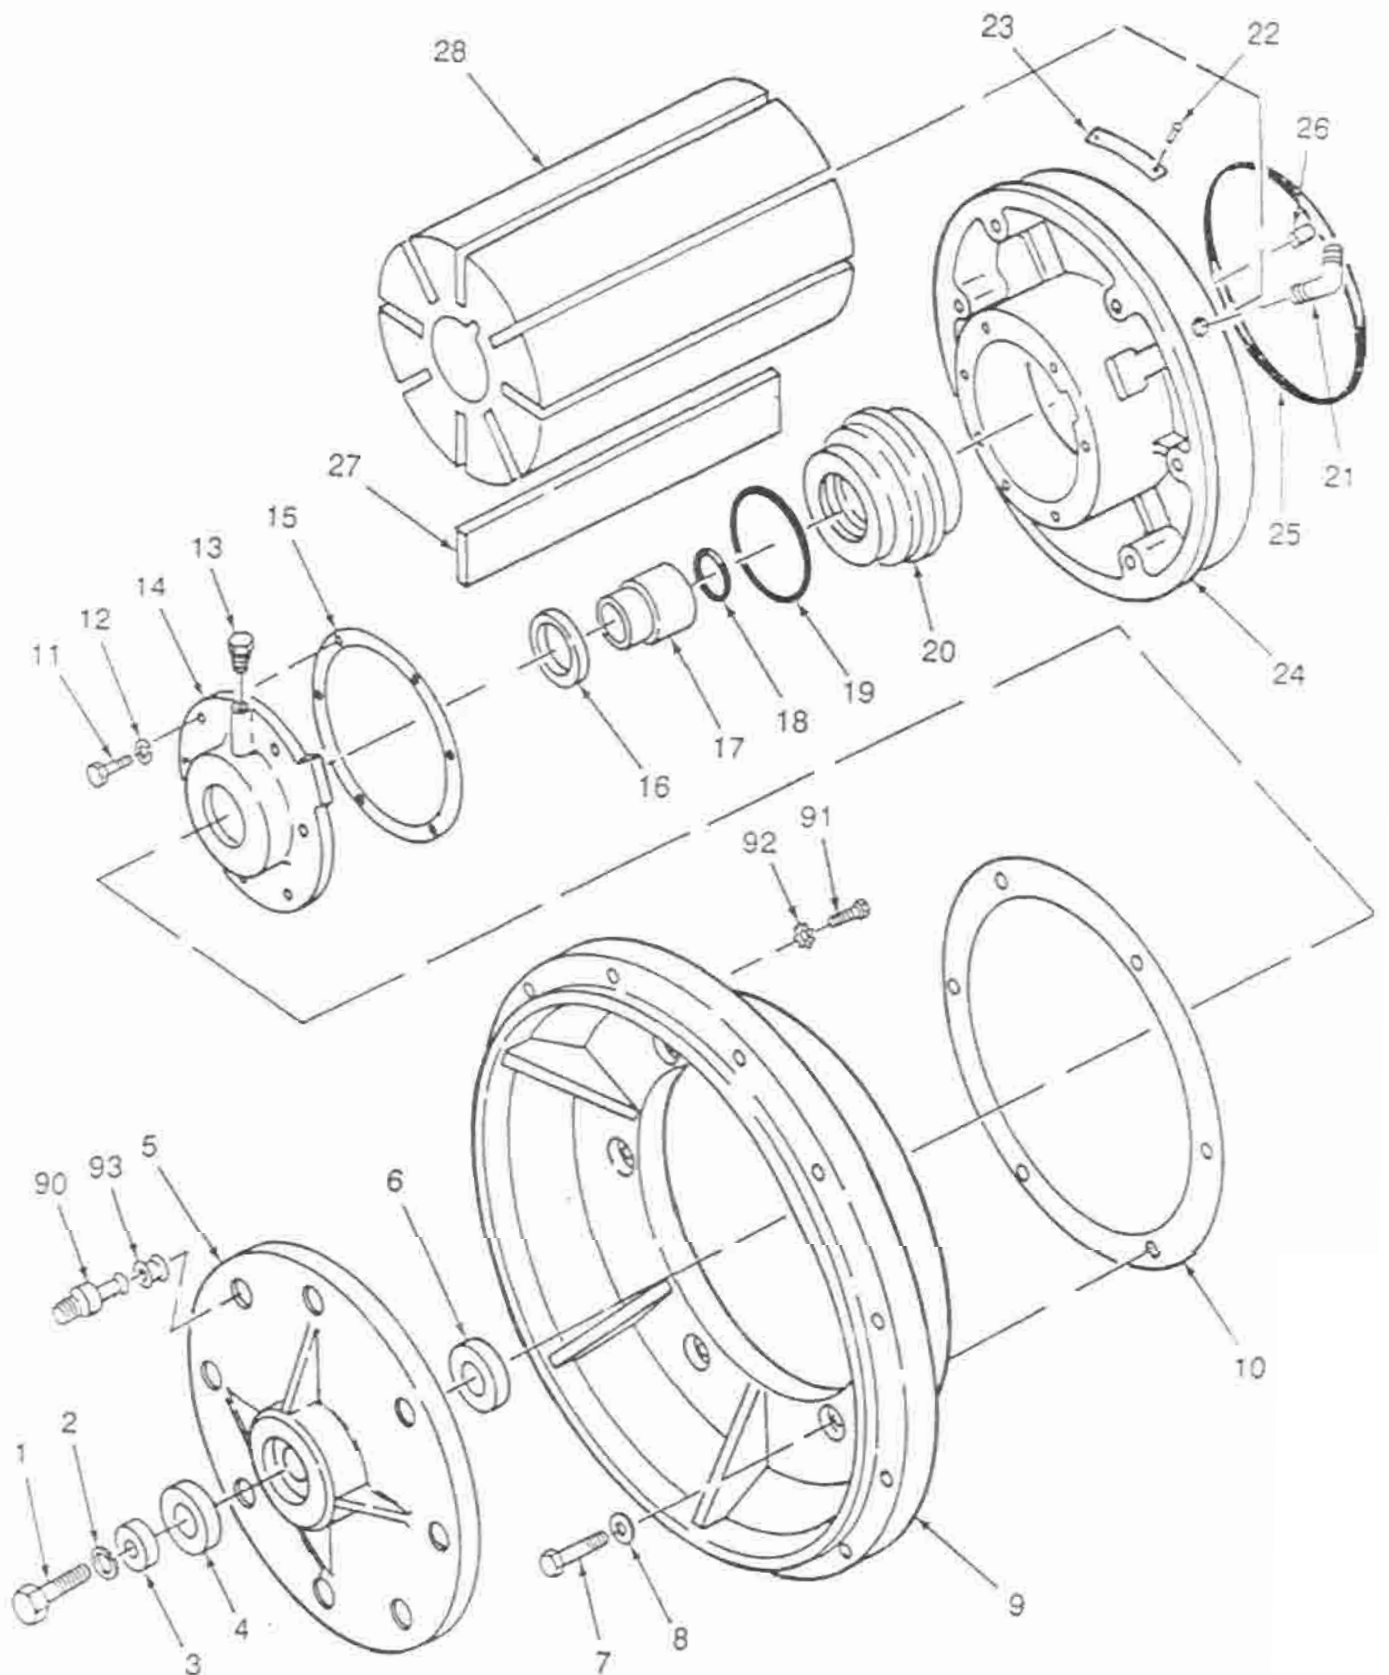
Compressor Assembly (Sheet 1 of 4)
